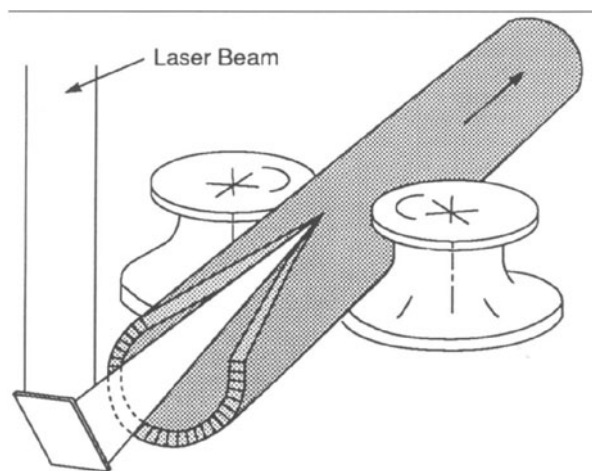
Set up for high-speed laser welding of pipe, with focusing of the beam into the wedge formed by shaping of pipe from sheet metal. Welding plated pipes is possible.
